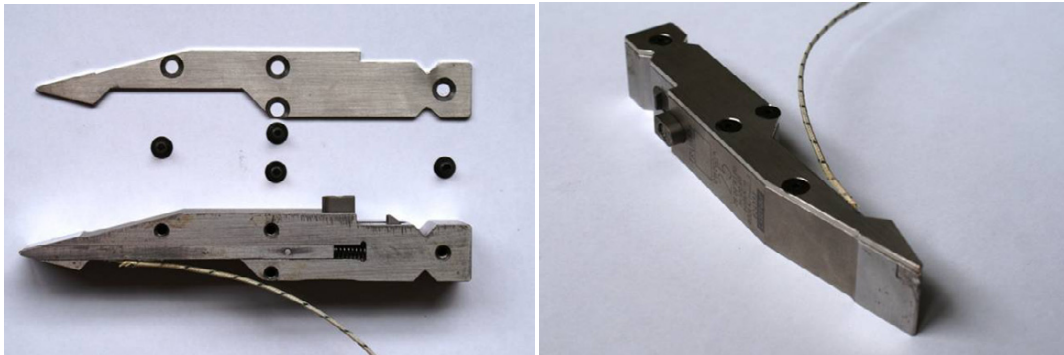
(a) Disassembled thermocouple and upper bending tool; (b) Assembled thermocouple and upper bending tool
